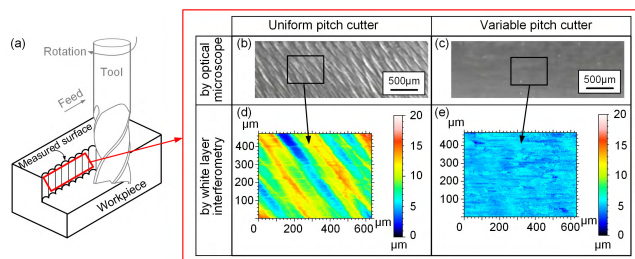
Measurement results of the machined surfaces: (a) the location of measurement area, (b) optical microscope image of the machined surface using the uniform pitch cutter, (c) optical microscope image of the machined surface using the variable pitch cutter, (d) surface texture of the machined surface using the uniform pitch cutter, (e) surface texture of the machined surface using the variable pitch cutter.
